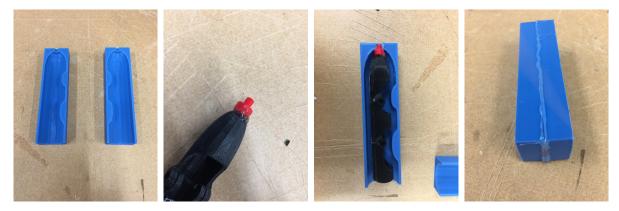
Assembling and sealing a 3D-printed finger mold. (a) The outer mold parts, to produce the external shape of the finger. (b) The tip of the inner finger joint, with the alignment pin glued into place. (c) The finger joint correctly aligned into the outer mold body. (d) The fully assembled and sealed finger mold.
